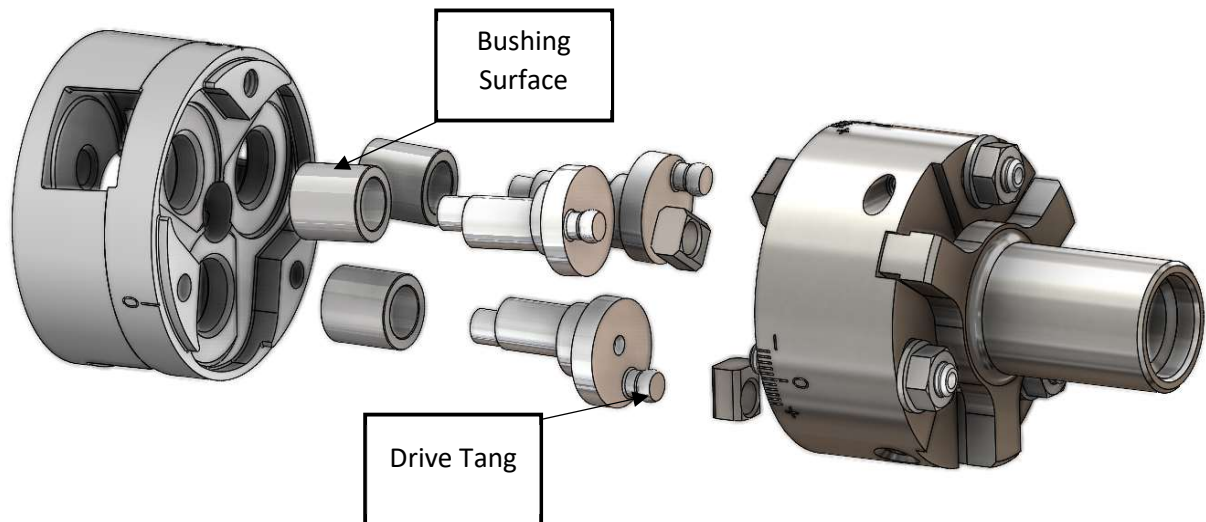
Opened 189 ER-01 Attachment, Exposed Bushings
